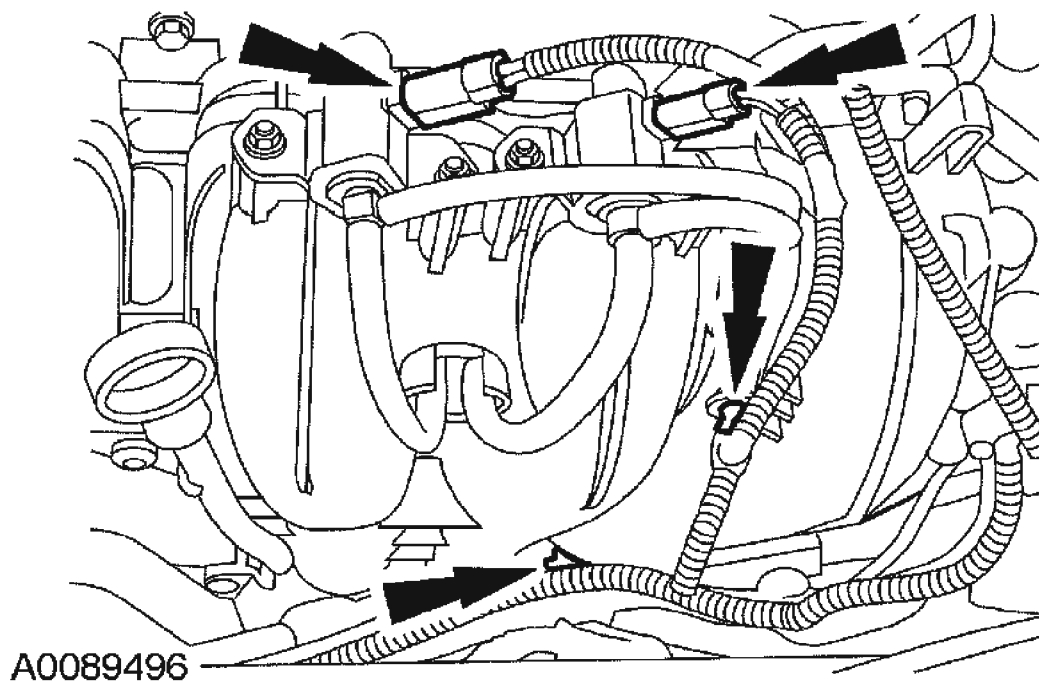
Disconnecting Swirl Valve Electrical Connectors And Pin-Type Retainers
